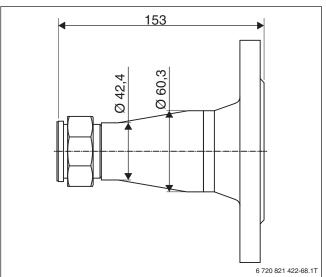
Adaptor DN 50/PN 16 - G 1 ½ " (dimensions in mm)
